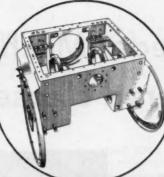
Sketch of a planet power drive gear housing for a TD-24 International Harvester crawler tractor. Side plates as well as some other parts of this weldment are heavy stampings.
